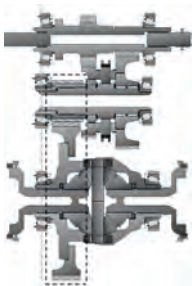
Cross-sectional view of the 2-Speed AMT Gearbox with differential. Highlighted gear pair is the final reduction
